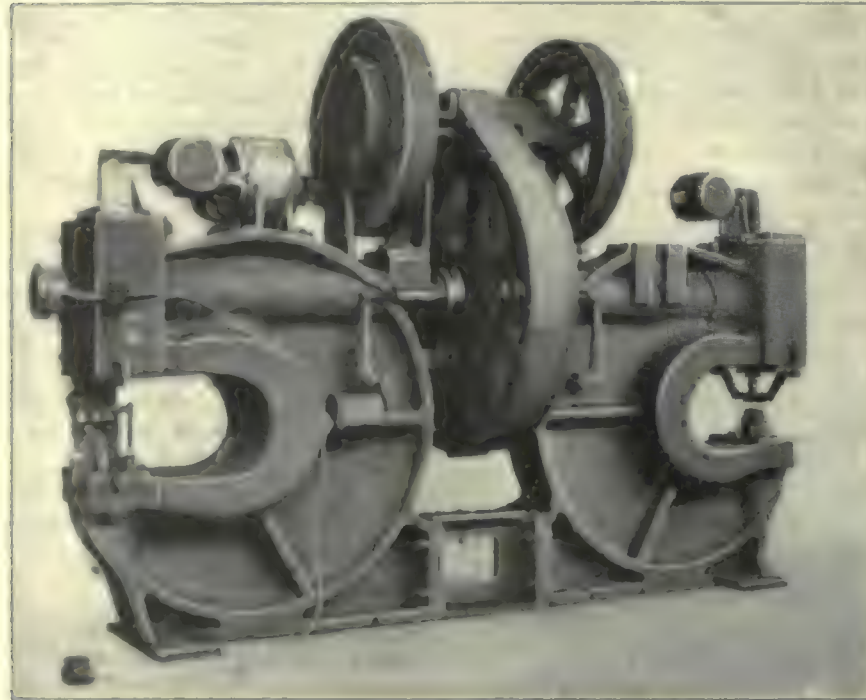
CHAMBERSBURG DOUBLE-END PUNCHING AND SHEARING MACHINE WITH ELECTRICAL CONTROL
